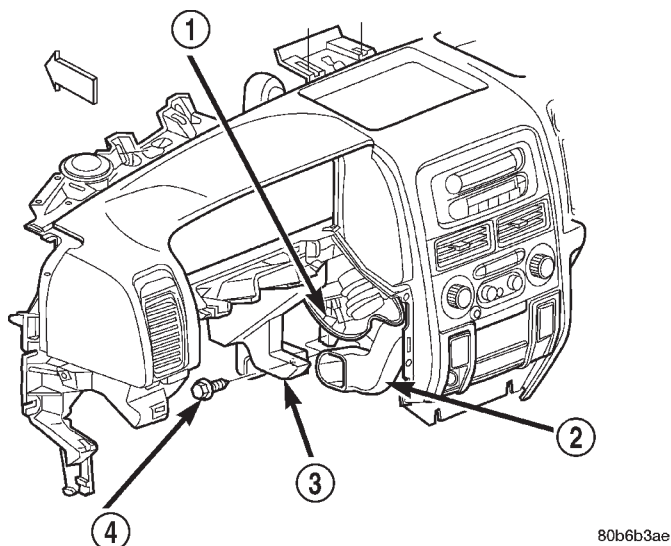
Instrument Panel to Heater-A/C Housing - Driver Side
